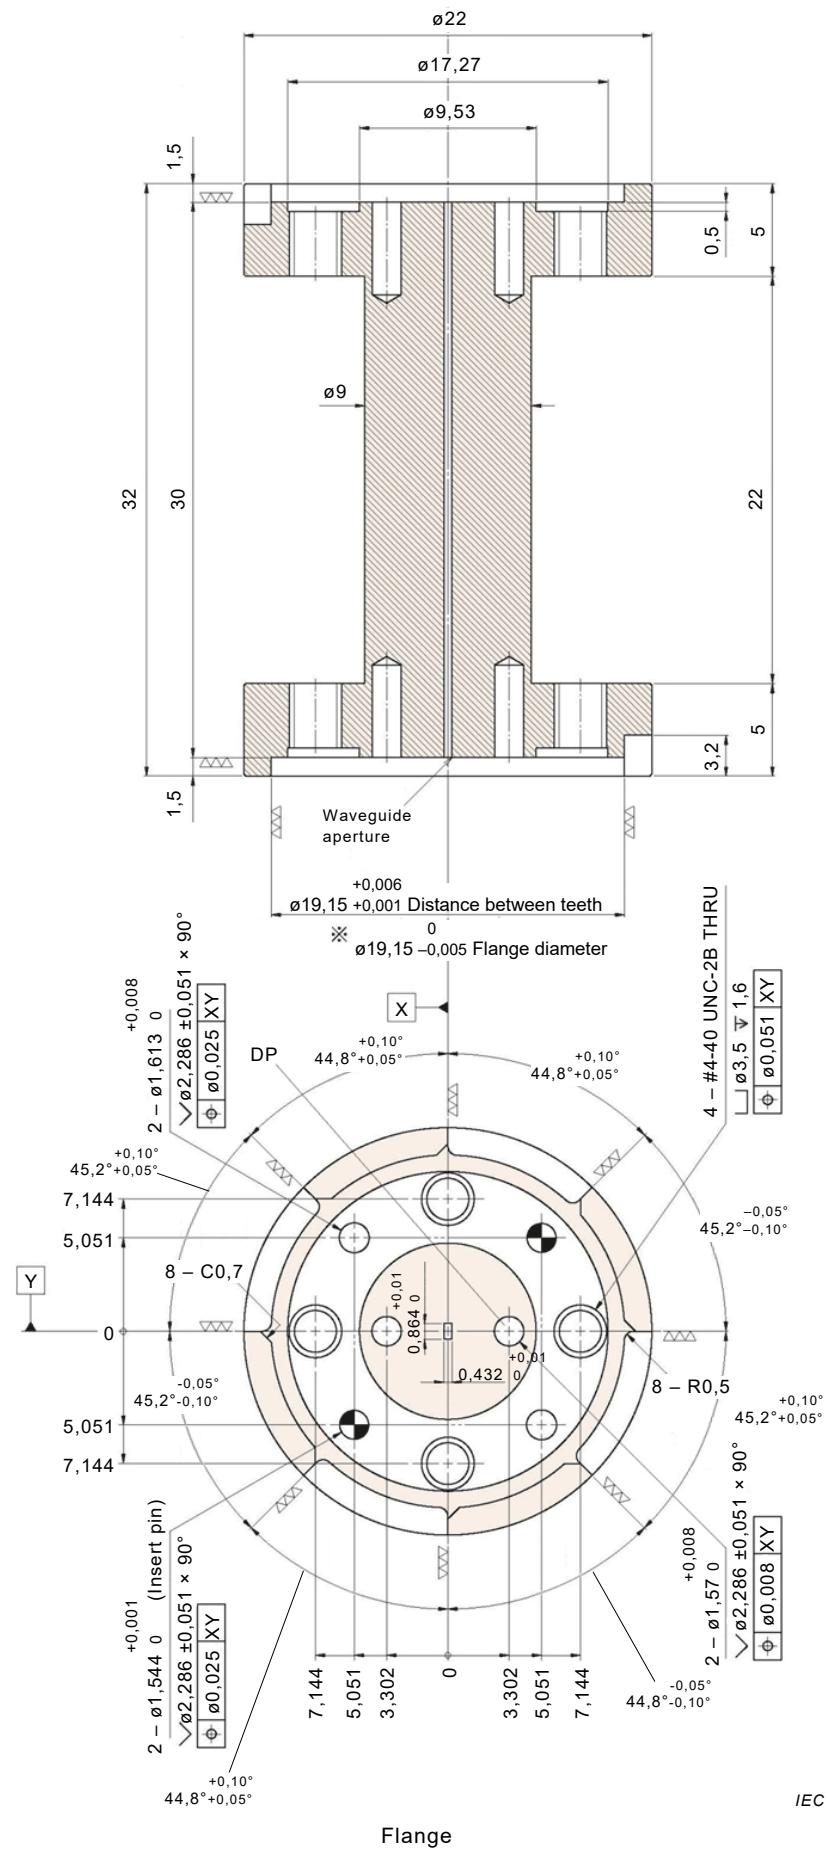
Flange type F: 60154 IEC-UFC without choke or gasket groove
